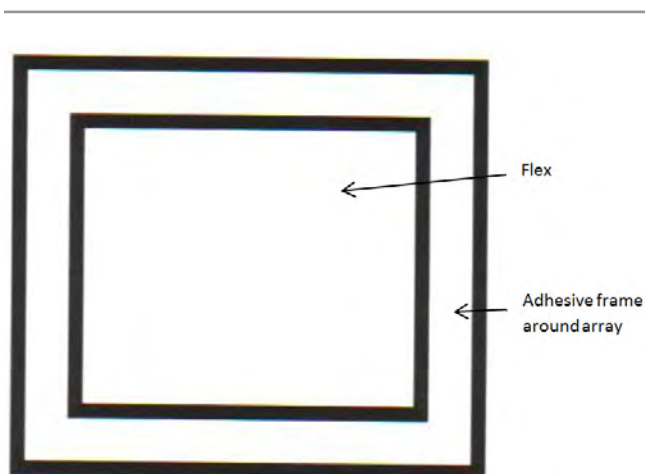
Array option with adhesive frame bonding the flex array to FR-4 for assembly.
